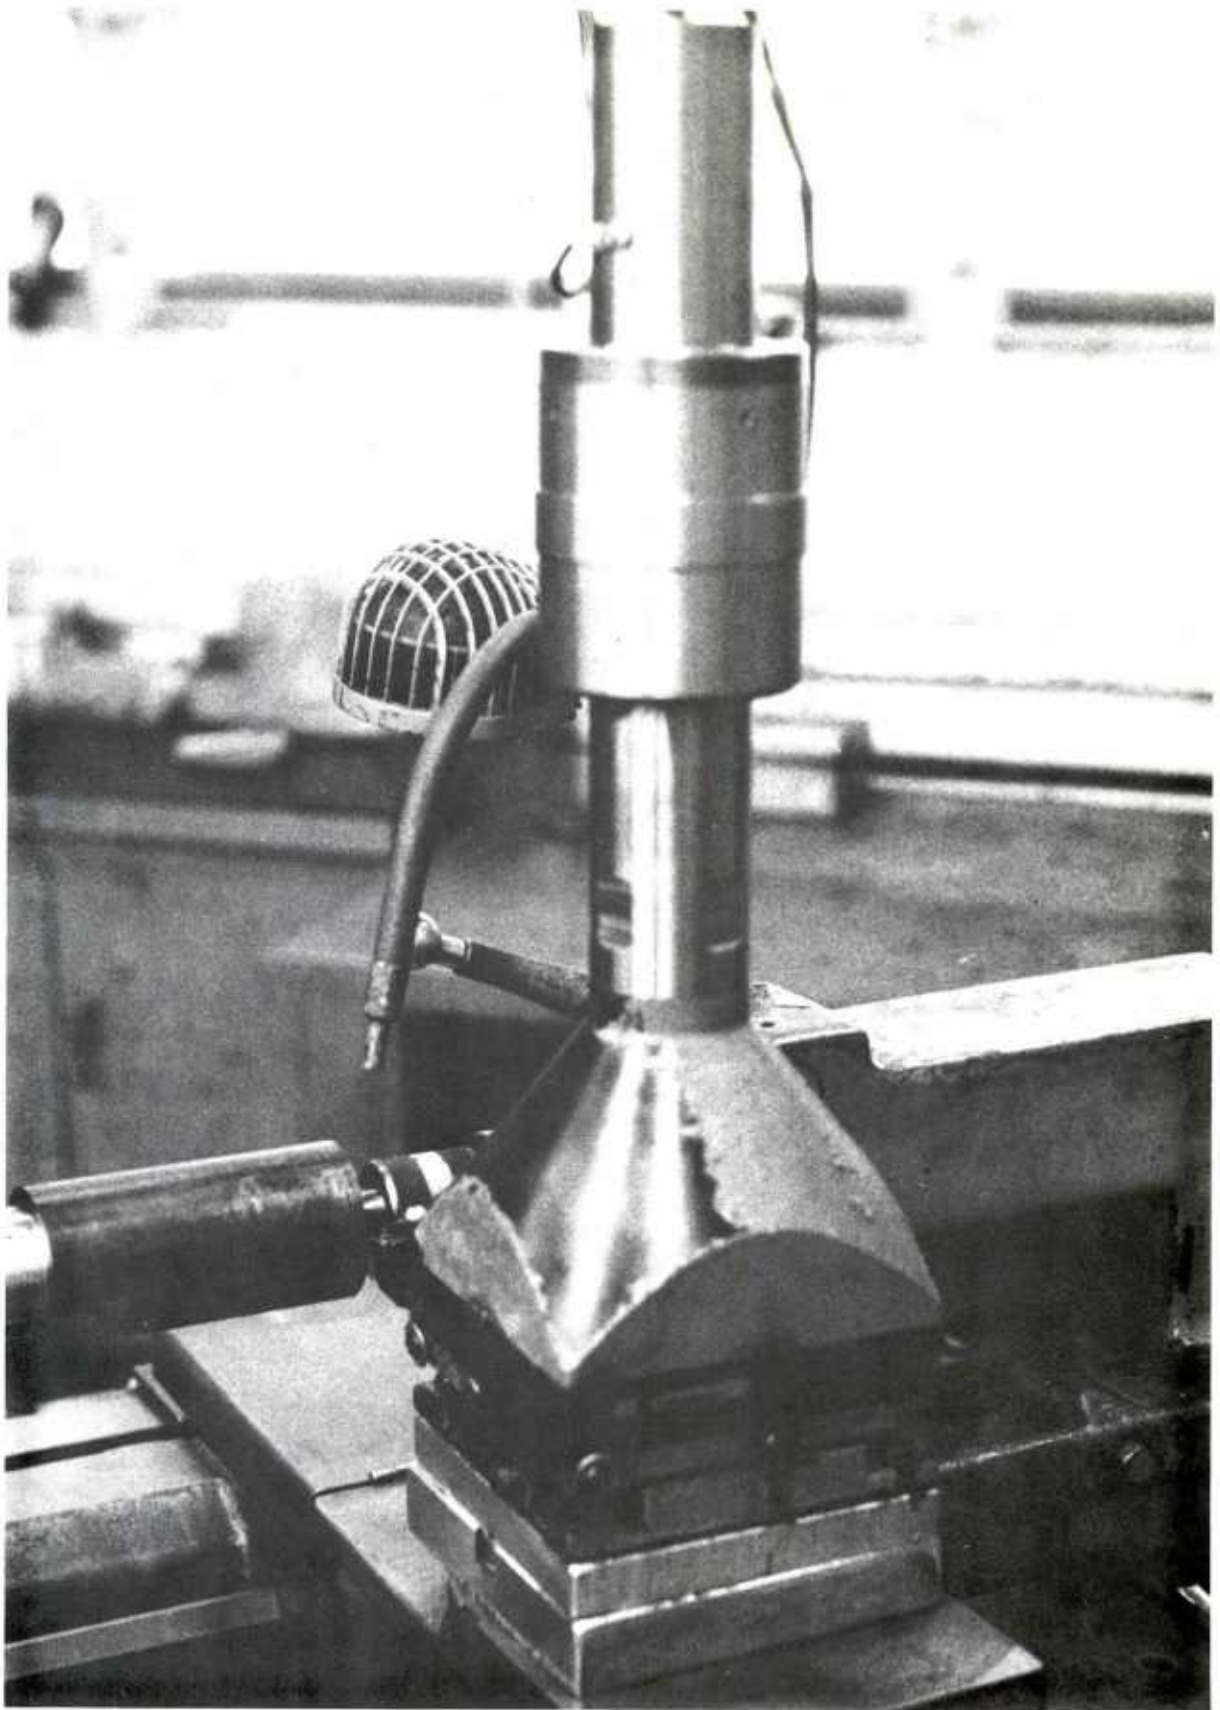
Ultrasonic tool post mounted on cross slide of LeBlond engine lathe.
